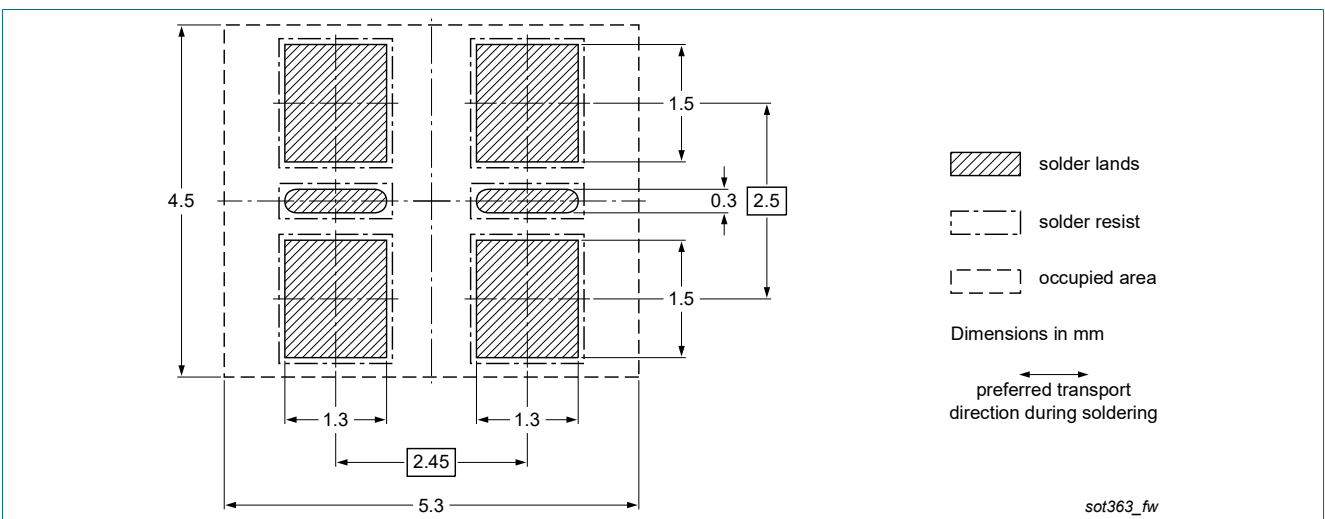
Wave soldering footprint SOT363 (SC-88)
